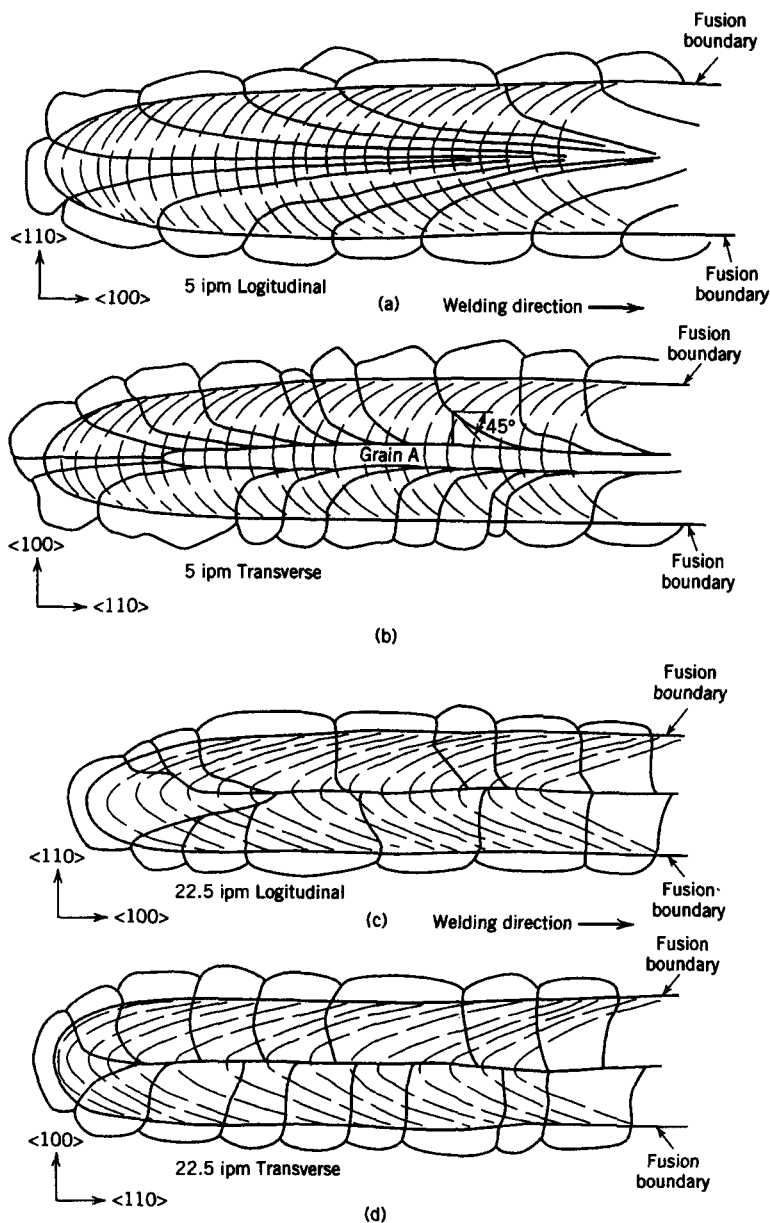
and d are tracings of welds made at higher welding speeds of 22.5 in./min, as evidenced by more elliptical (tailed) weld pool ripple marks. Although growth is still epitaxial, the grain boundaries extend all the way to the centerline of the weld and are essentially perpendicular to the welding direction due to the direction of the temperature gradient for this tailed puddle.
